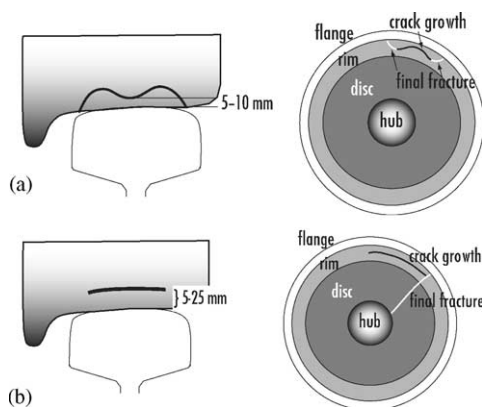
Typical appearance of subsurface fatigue cracks in railway wheels: (a) shallow initiation and (b) deep initiation at a defect.
